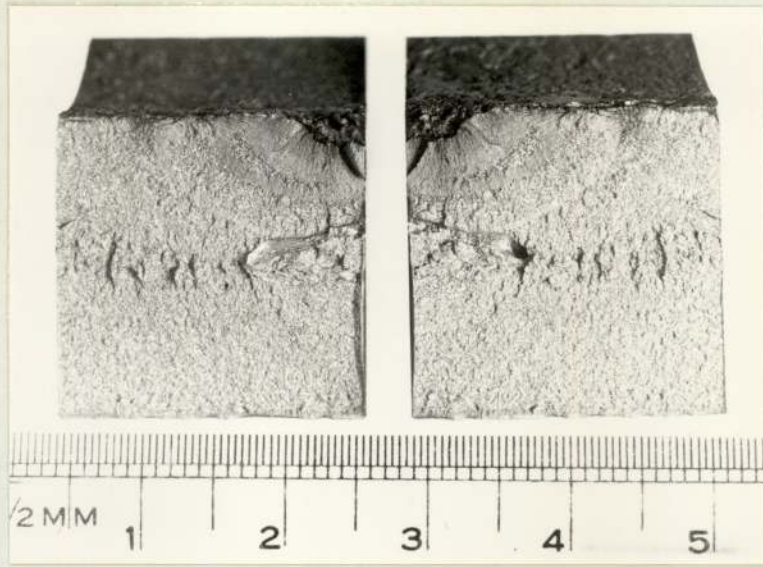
Material B Cast Specimen Fracture Surface.
